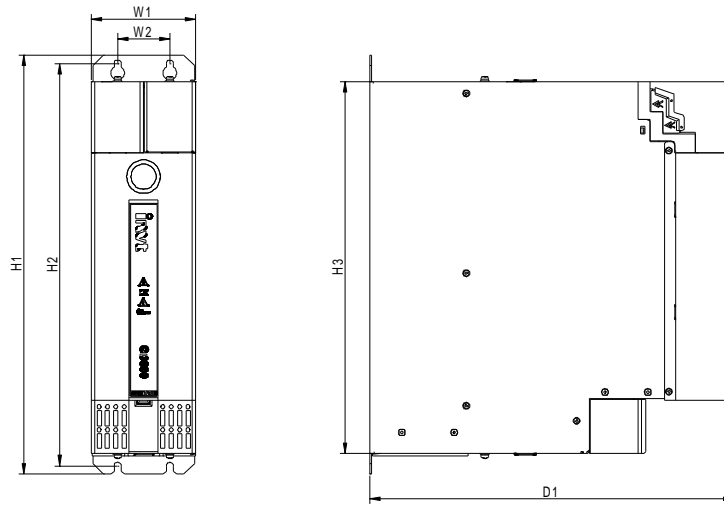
Wall-mounting drawing for the 380V 45kW rectifier unit
